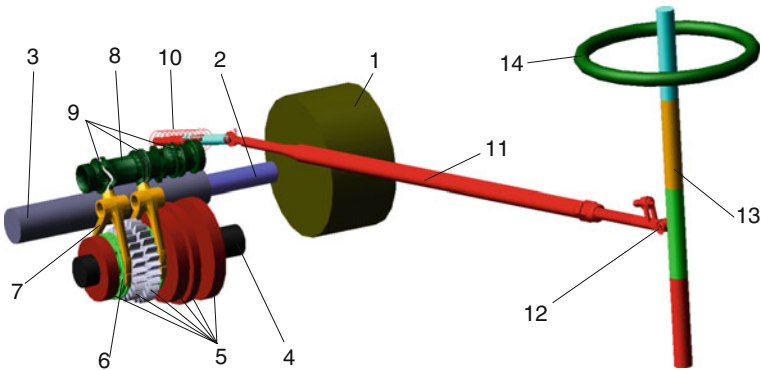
Geometrical representation of the model of a gearbox and a gear-shifting mechanism
